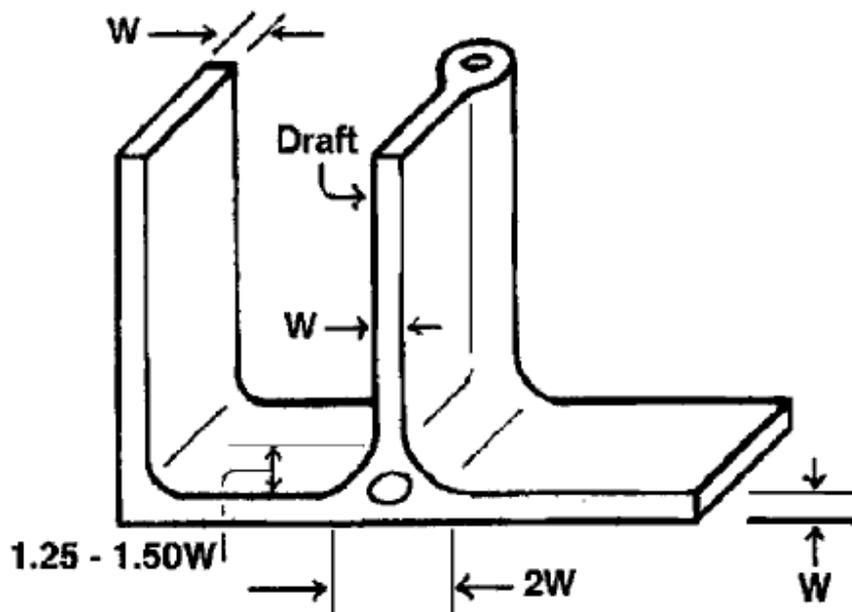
Gas-assisted injection molding rib and boss design guidelines.
